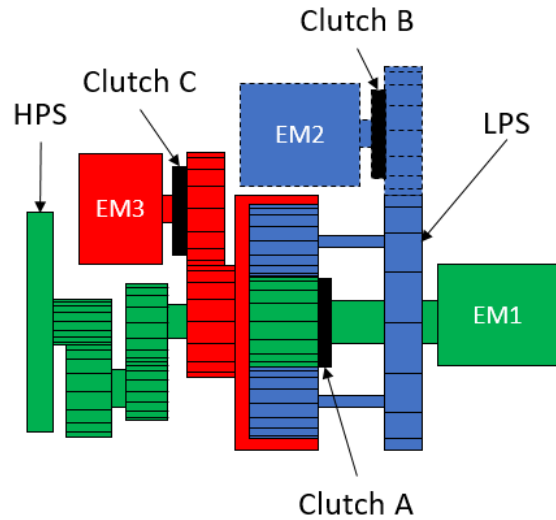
Rigid power flow paths for the SP gearbox with all clutches engaged
